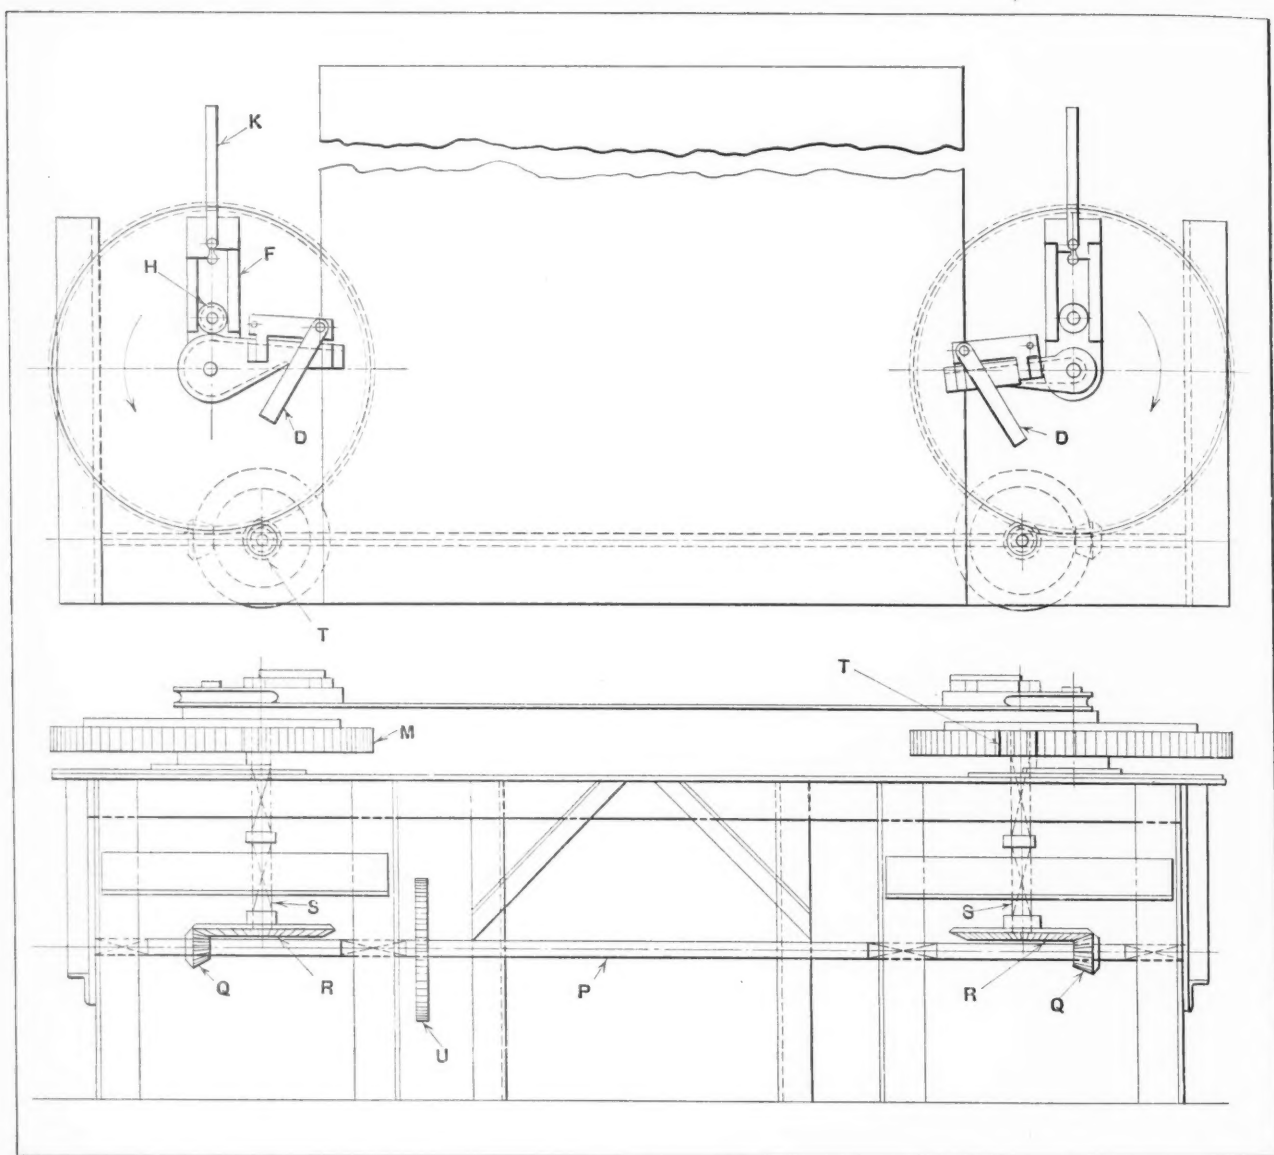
Machine for Bending Coils Such as Shown in Fig. 1
